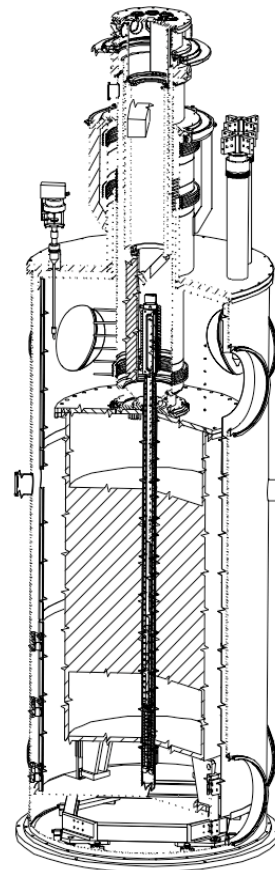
The 3D technical drawn of the vacuum vessel of the dipole
